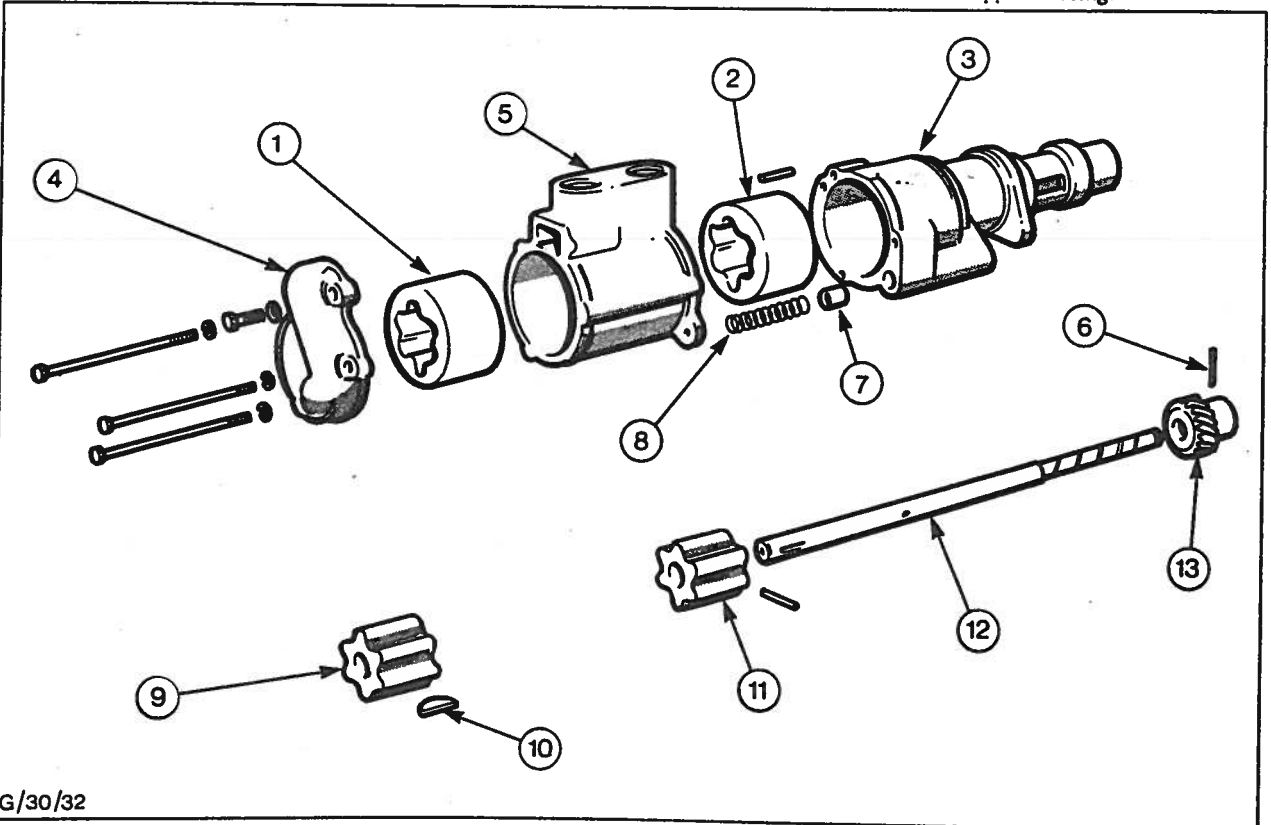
Oil Pump Fitted to 2722, 2723, 2725 and 2726T Engines with High Inclination Oil Pan
